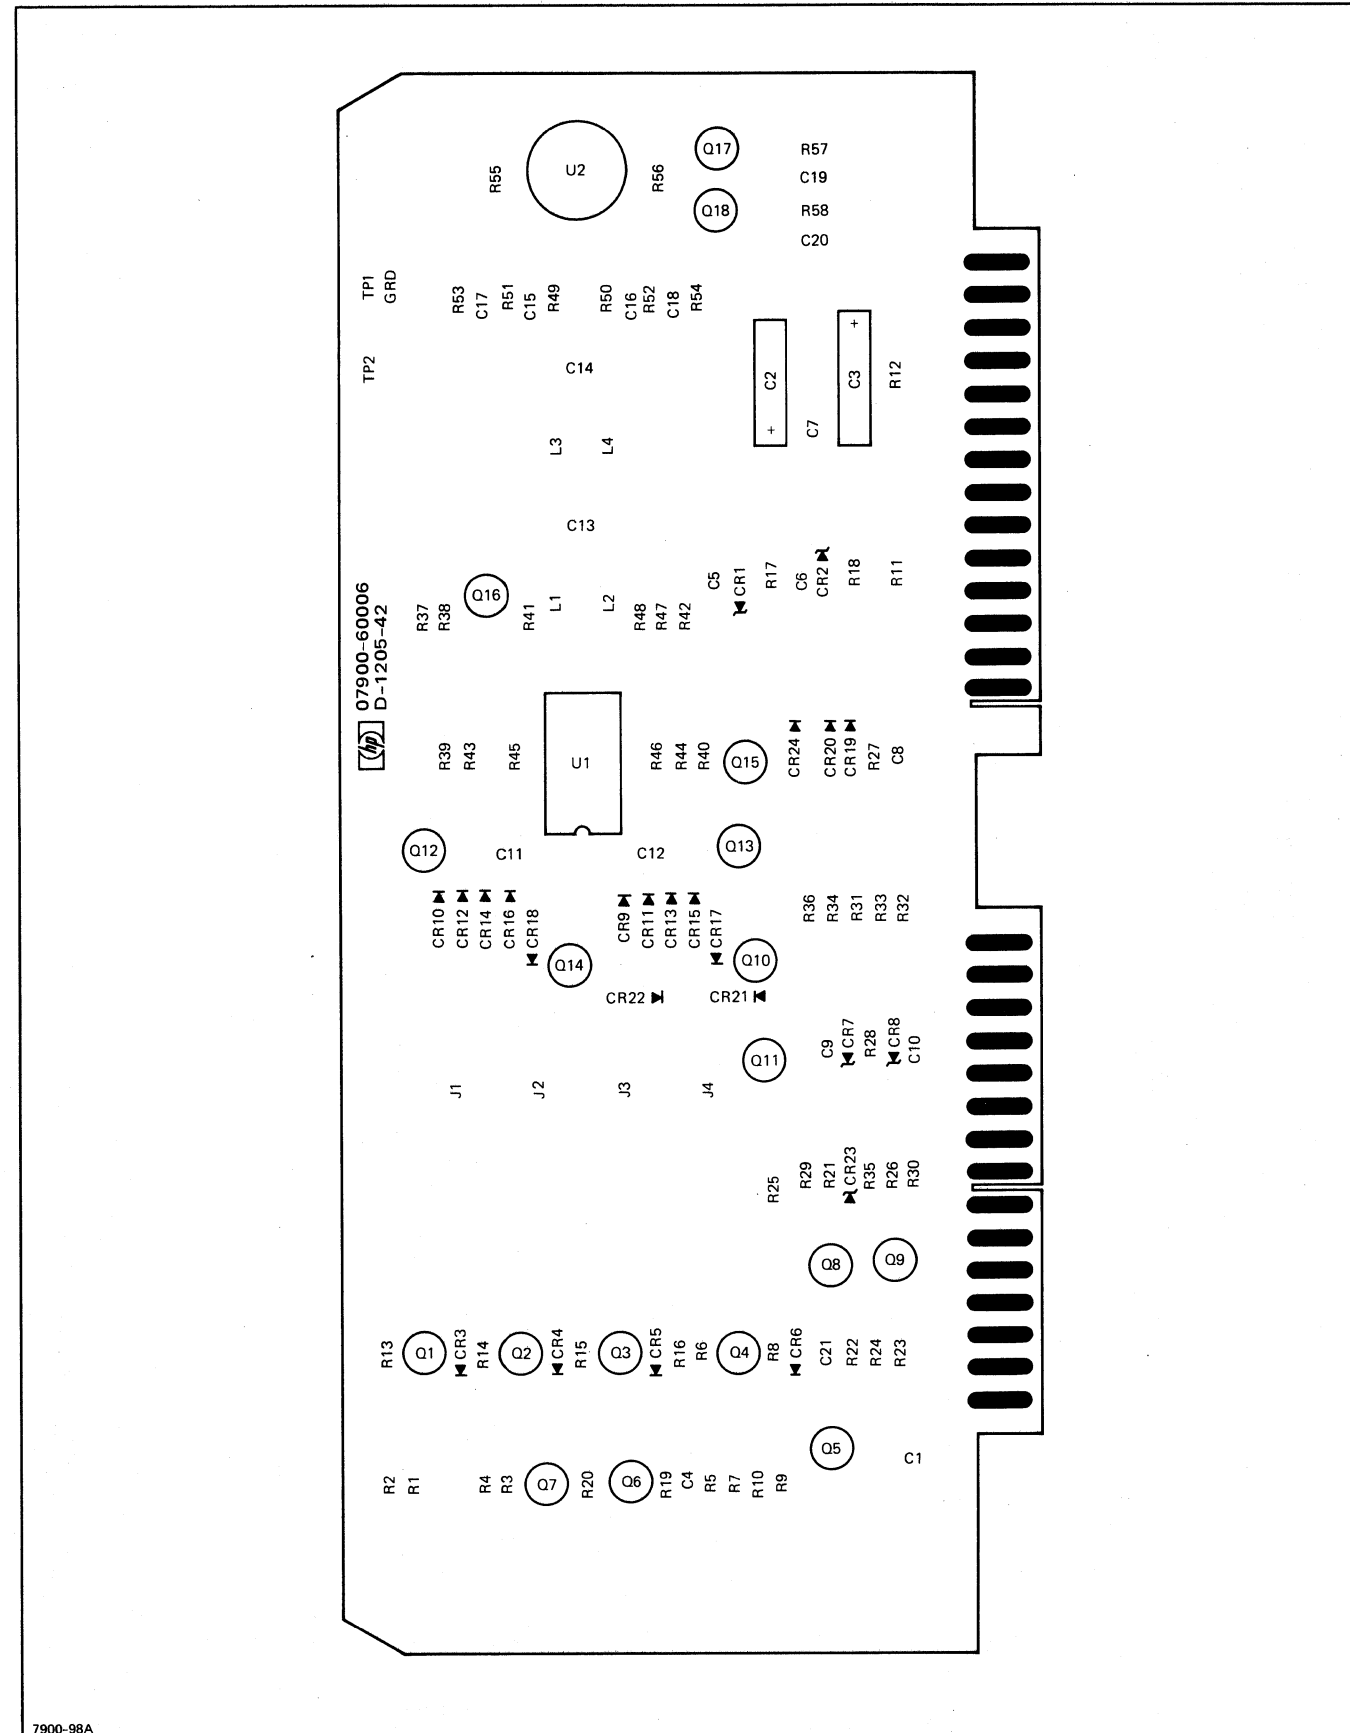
Read Preamp and Write Driver Assembly A13 Parts Location Diagram
